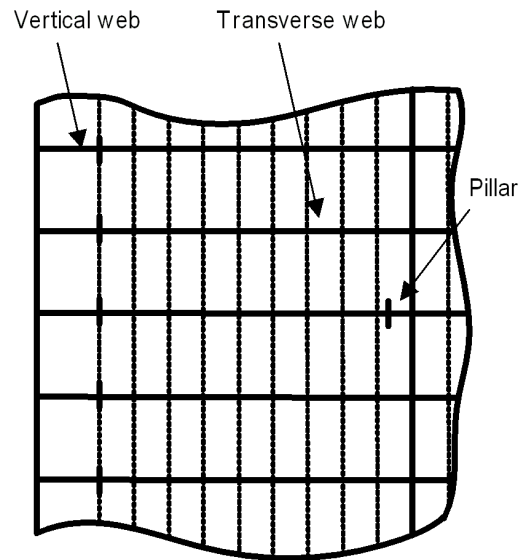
Typical deck plan for conventional (rigid deck design) car carrier
